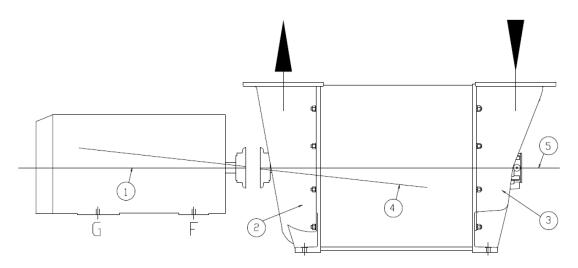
Calculation of the adjustment with the motor on the outlet end
